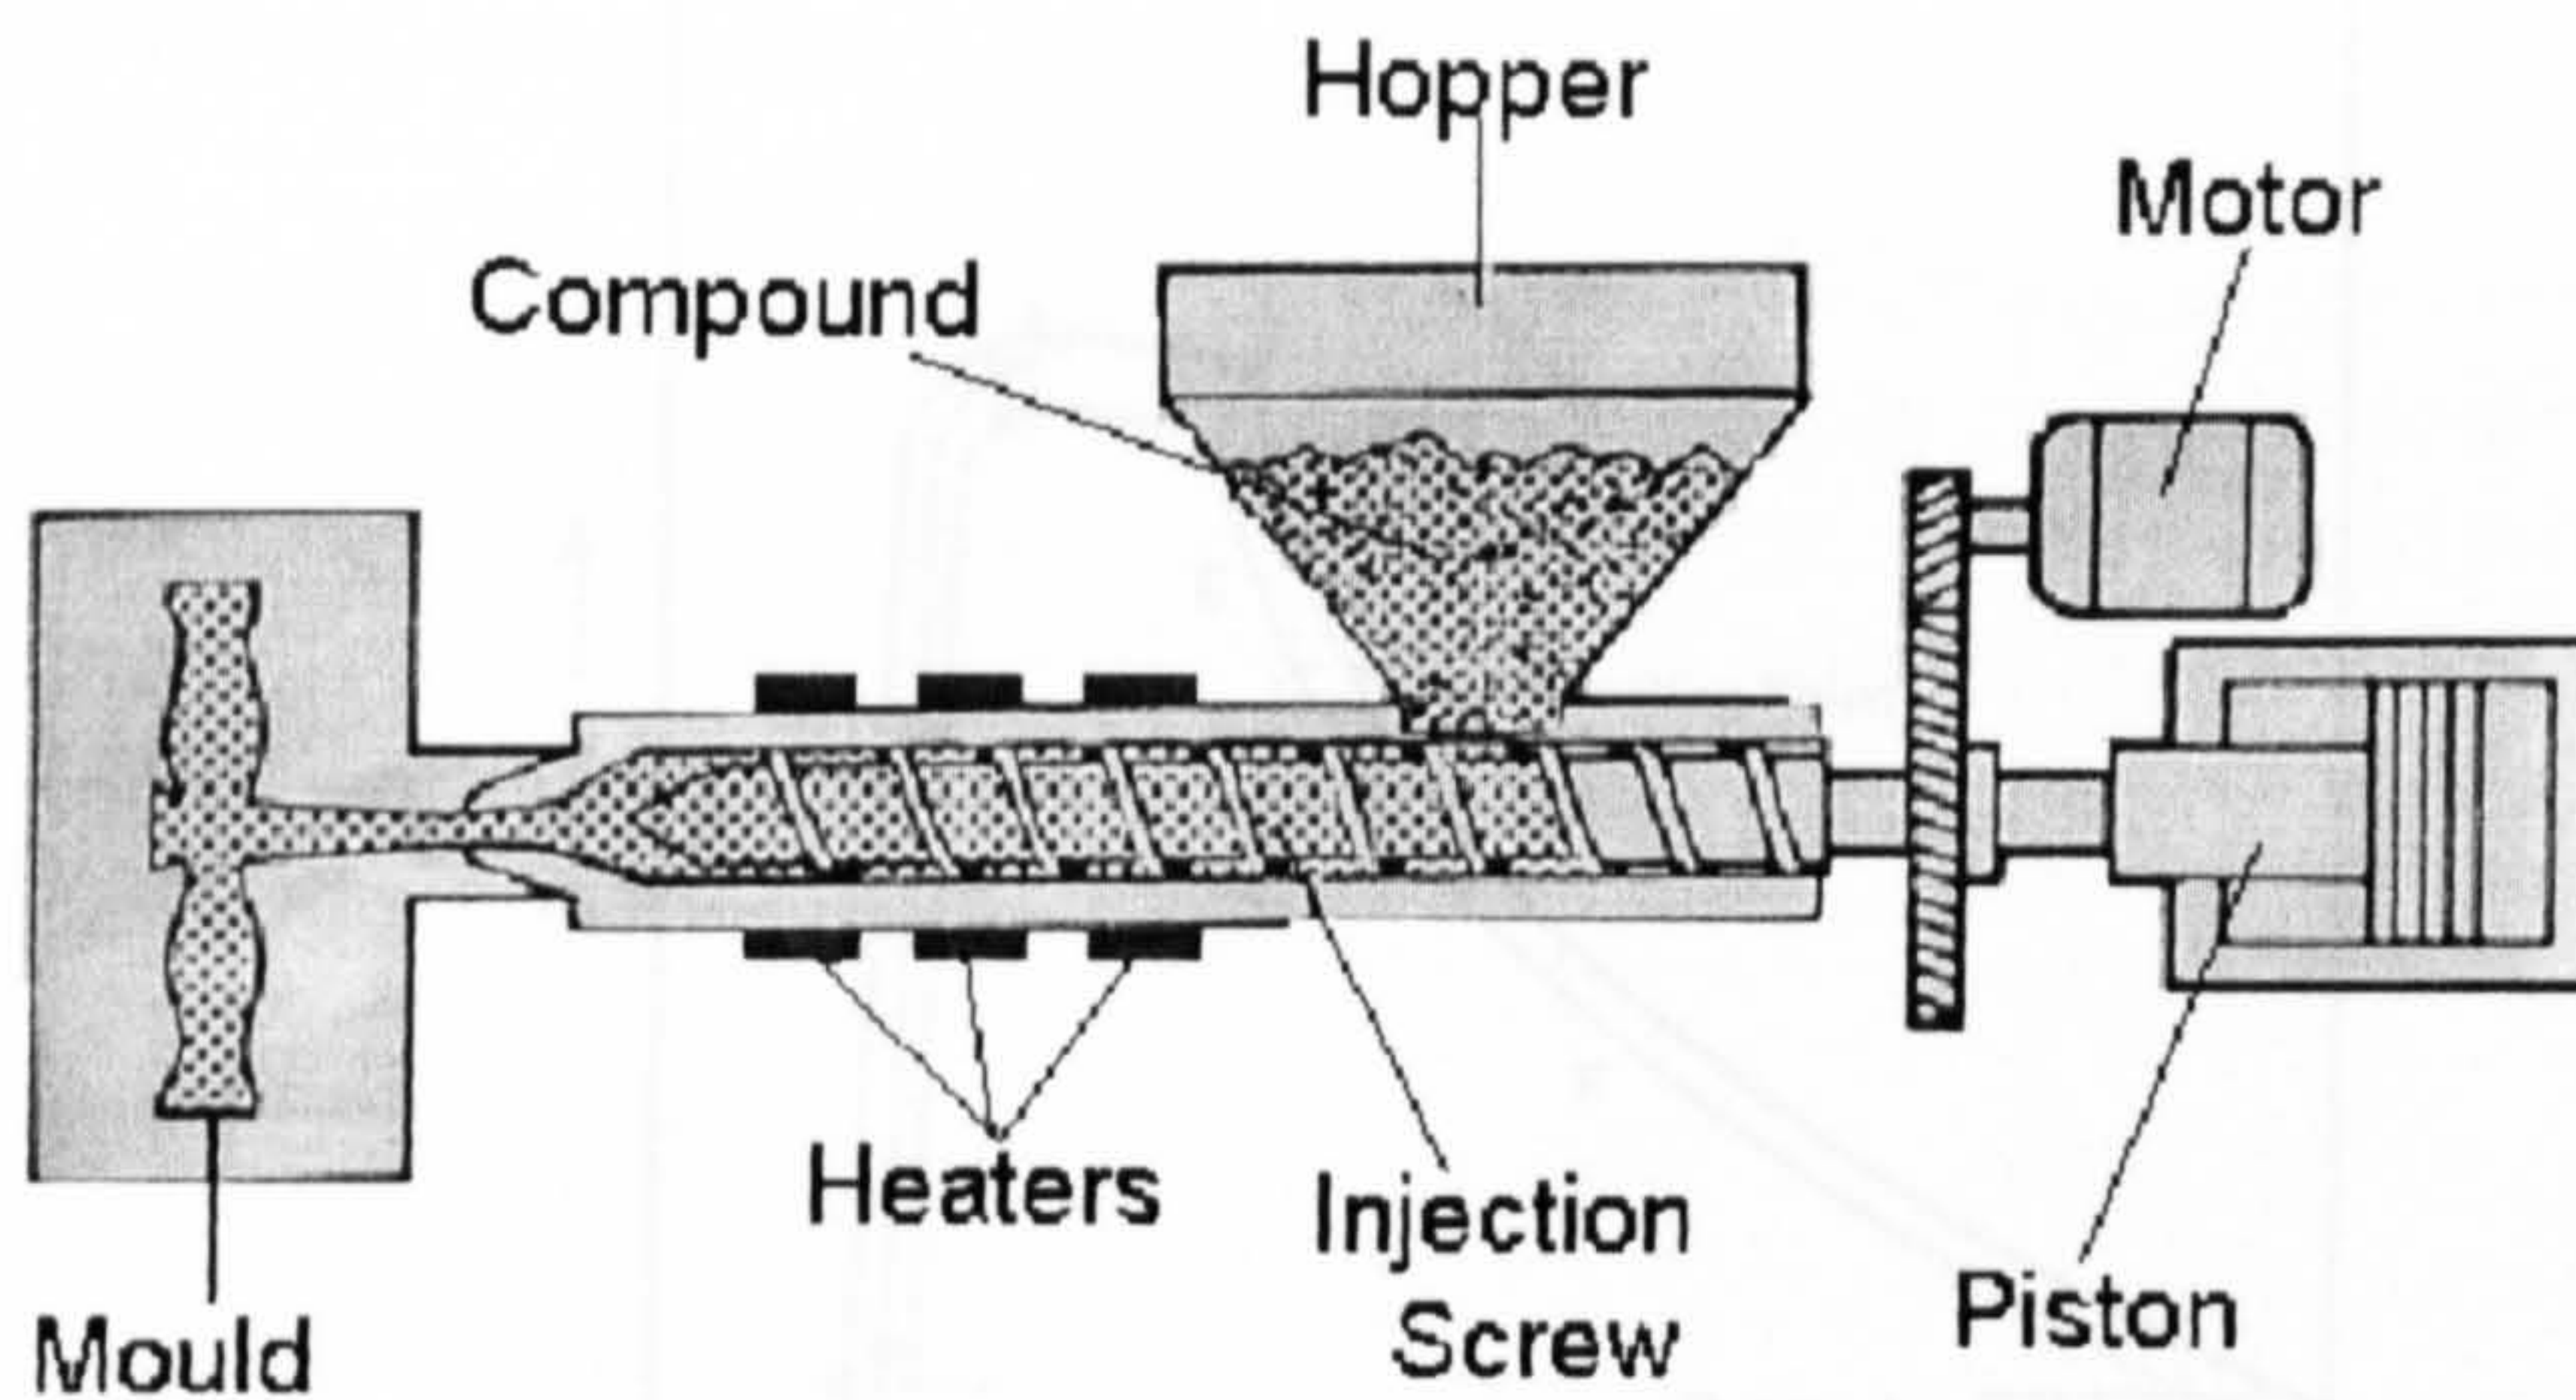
Schematic of a basic injection moulding machine[12, pp191-194].
